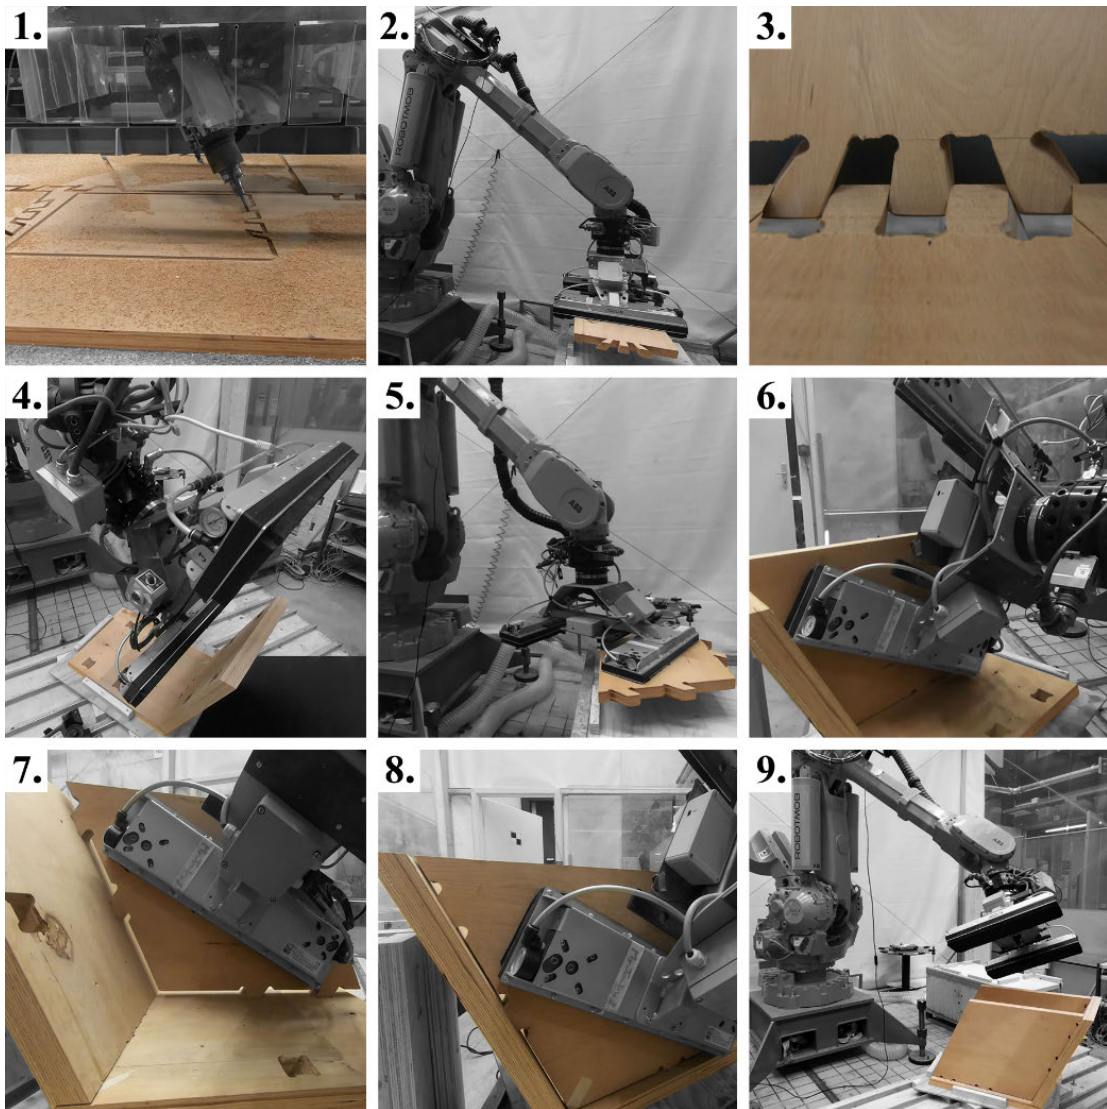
CNC cutting and robotic assembly of one module of the doubly-curved vault prototype.
